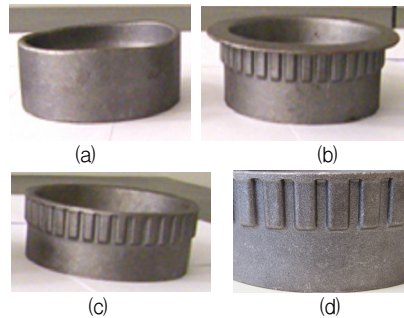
Deformed shape of the Case-5: (a) blocker, (b) finisher, (c) trimming, and (d) detail view of teeth
